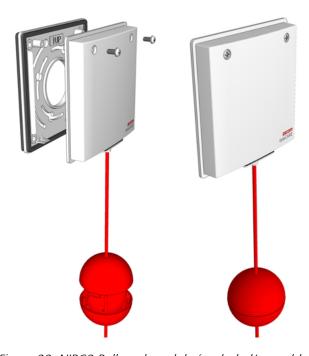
NIPC2 Pull cord module (exploded/assembled)
